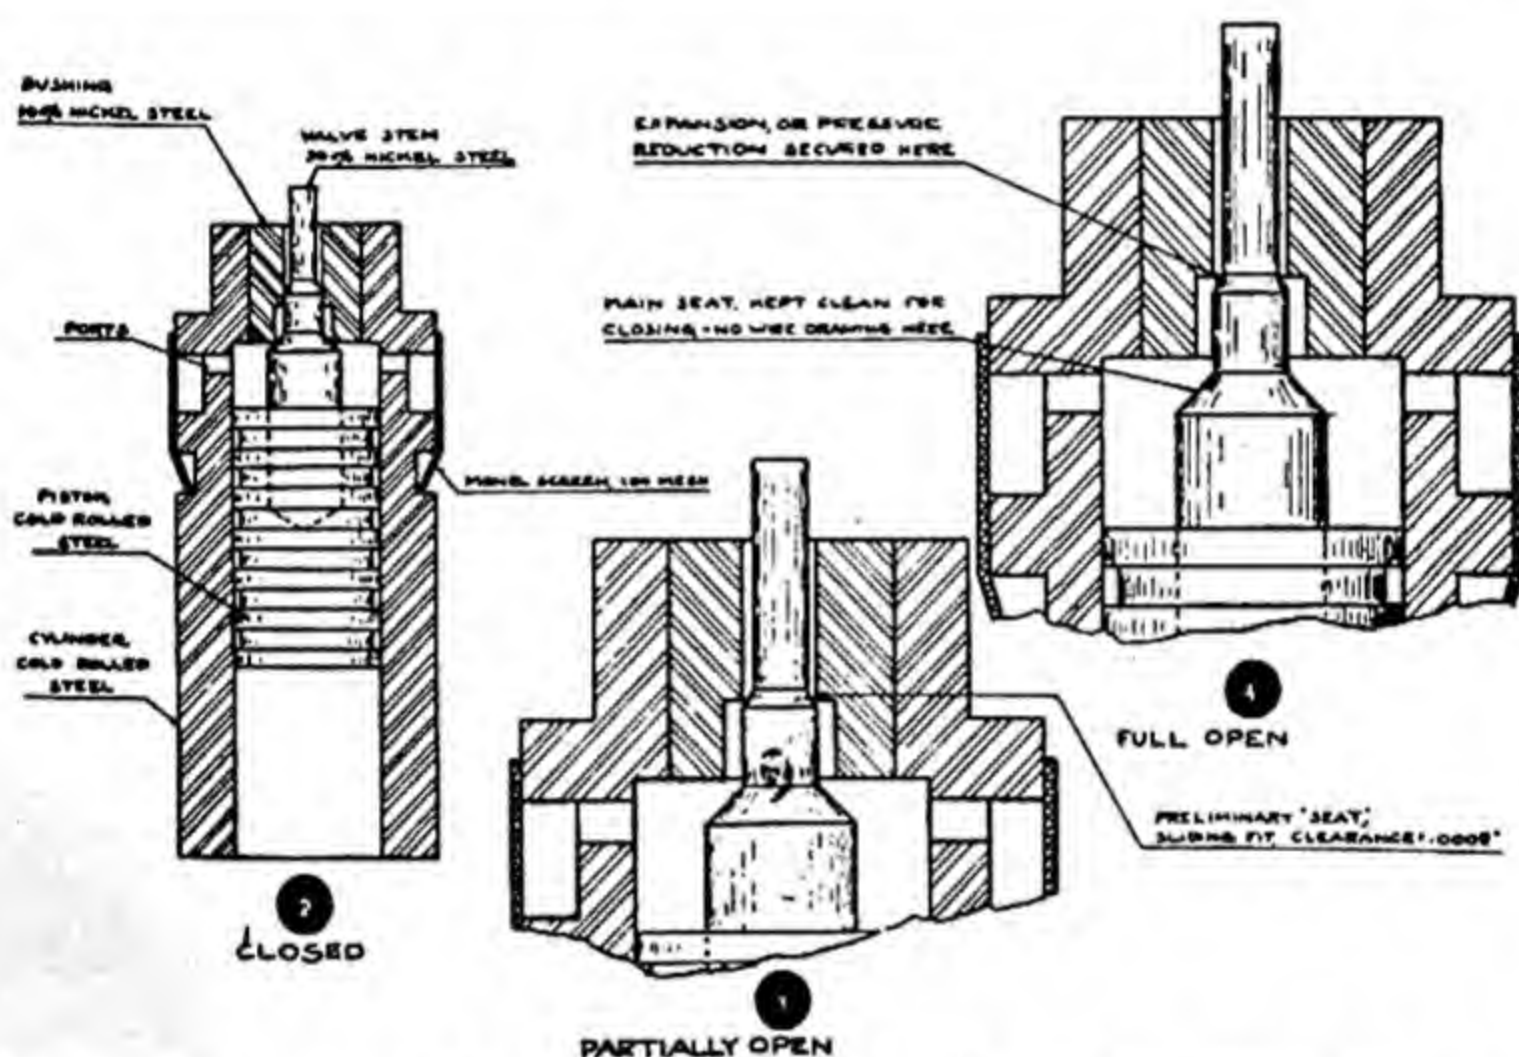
Expansion Valve (2) Closed; Expansion Valve (3) Partially Open; Expansion Valve (4) Fully Opened.
